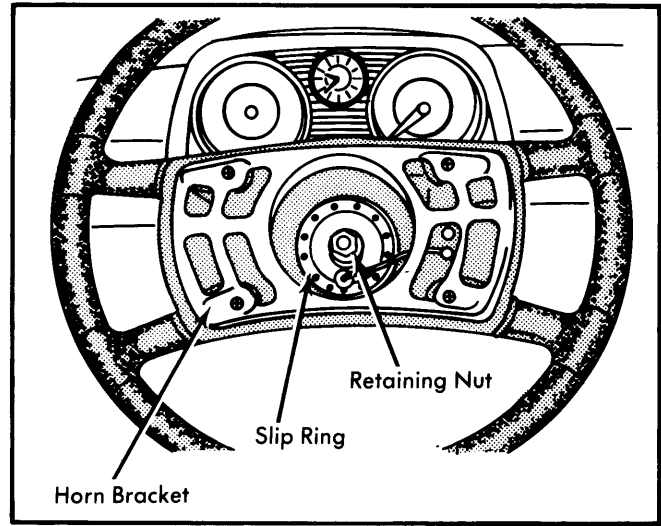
Mercedes-Benz Steering Wheel with Cover Removed
